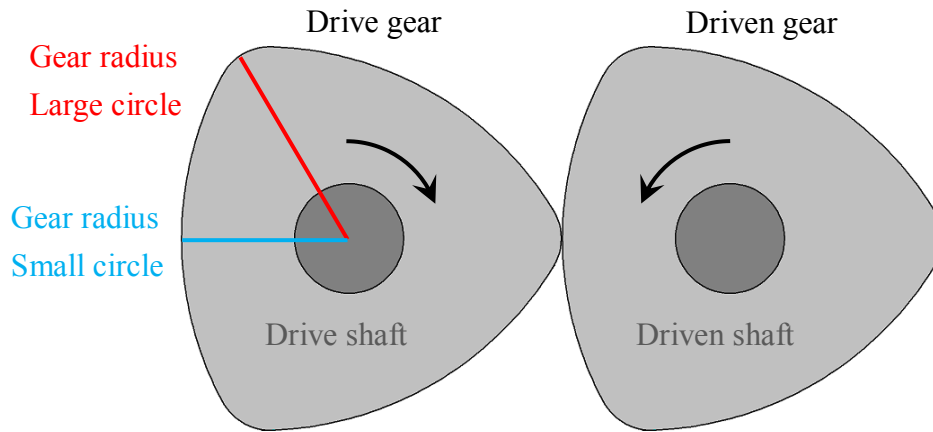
Three lobe type elliptical gears (Positive type)
